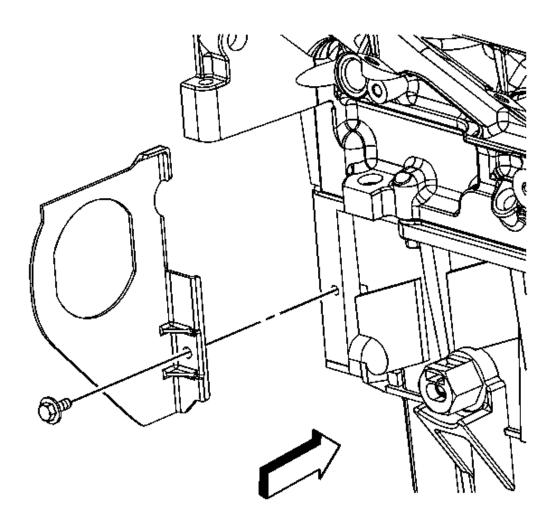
View Of Right Side Transmission Cover Bolt Courtesy of GENERAL MOTORS CORP.
